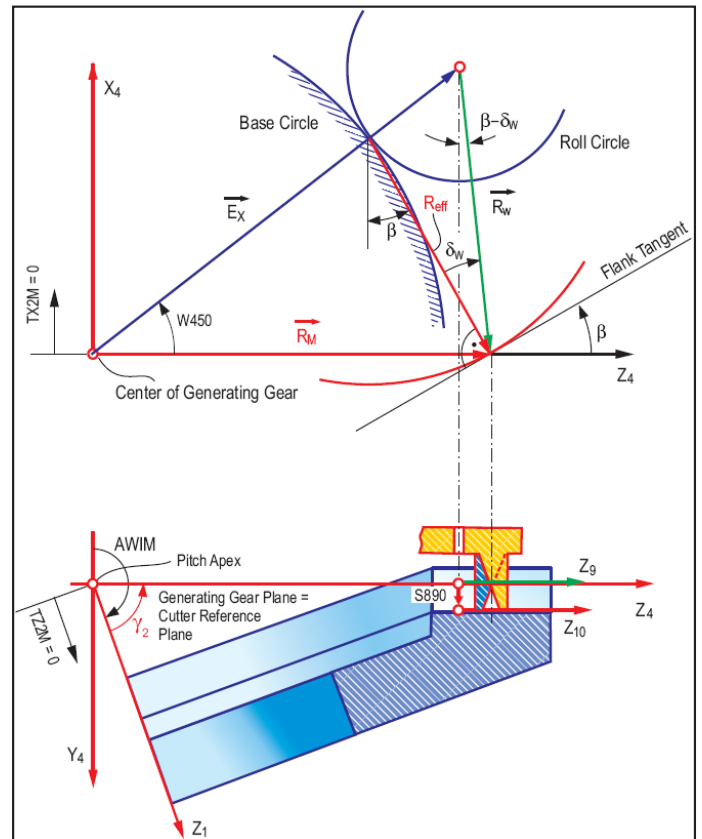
Ring gear, basic machine model, upper graphic: → front view; lower graphic → top view.
